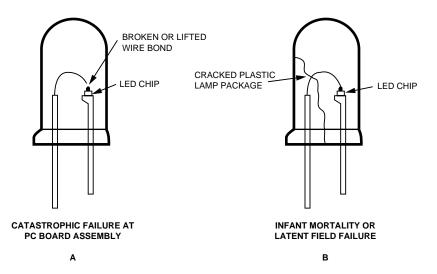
Typical LED Failure Modes That Can Occur at PC Board Assembly Due to Poor Process Control.
